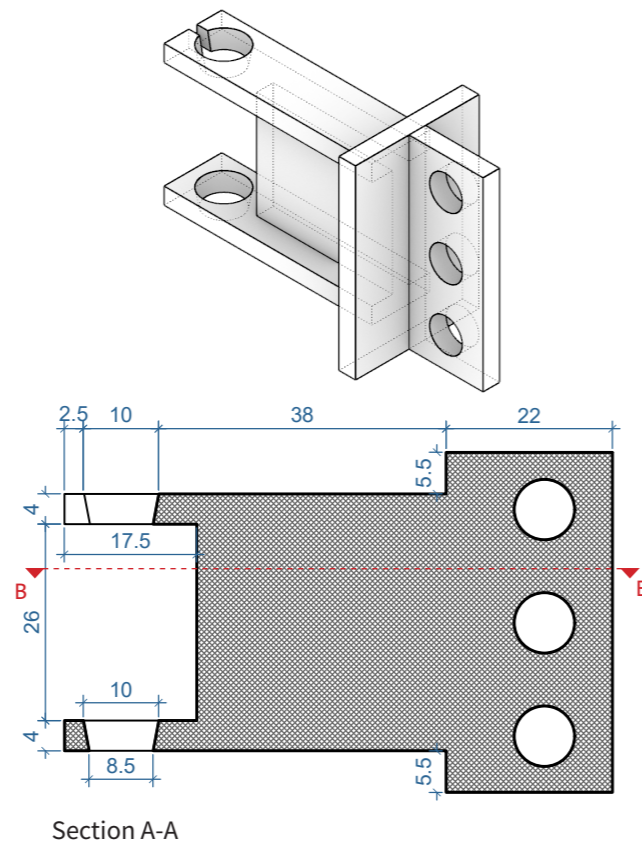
Technical drawings of Gasket G6 V- Uni.conn | Source: Author
